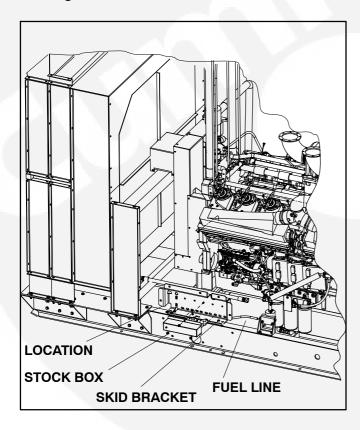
FUEL FILTER ASSEMBLY LOCATION ON GENERATOR SET
